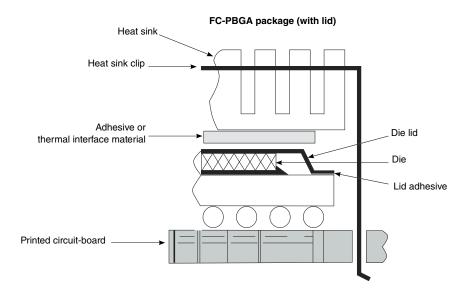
Package exploded, cross-sectional view-FC-PBGA (with lid)
